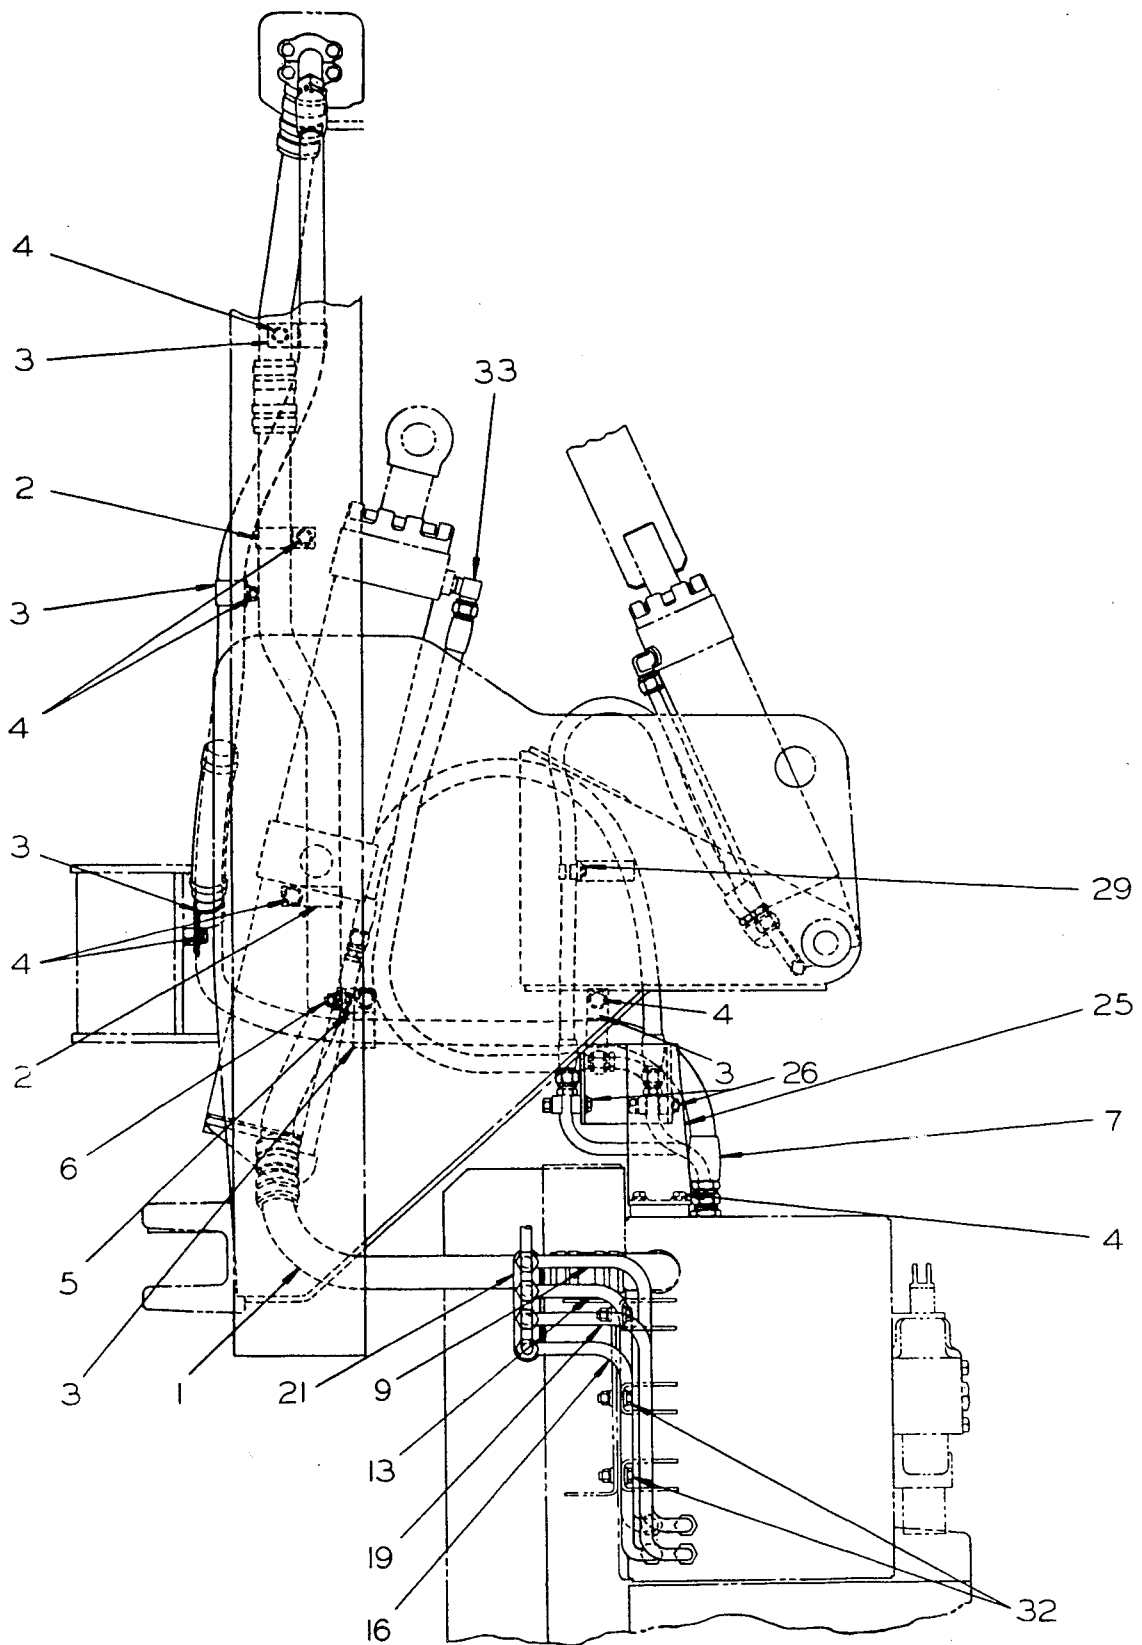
HYDRAULIC PIPING GROUP - SIDE VIEW
